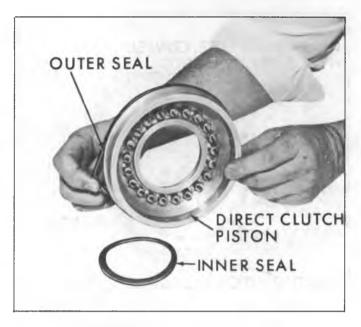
M--Removing Direct Clutch Outer and Inner Seals
